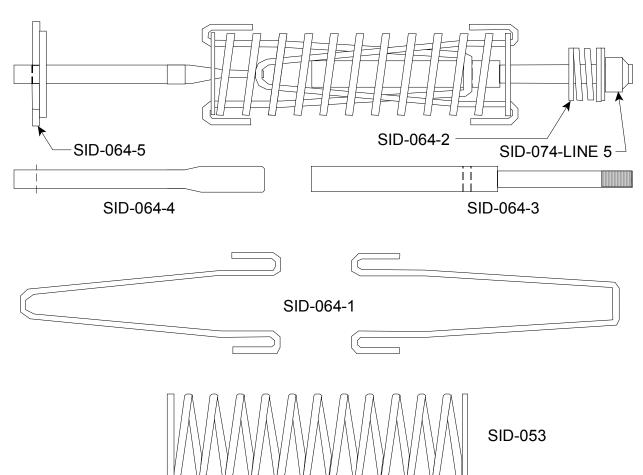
RIB WRAP ASSEMBLY, SID-040
